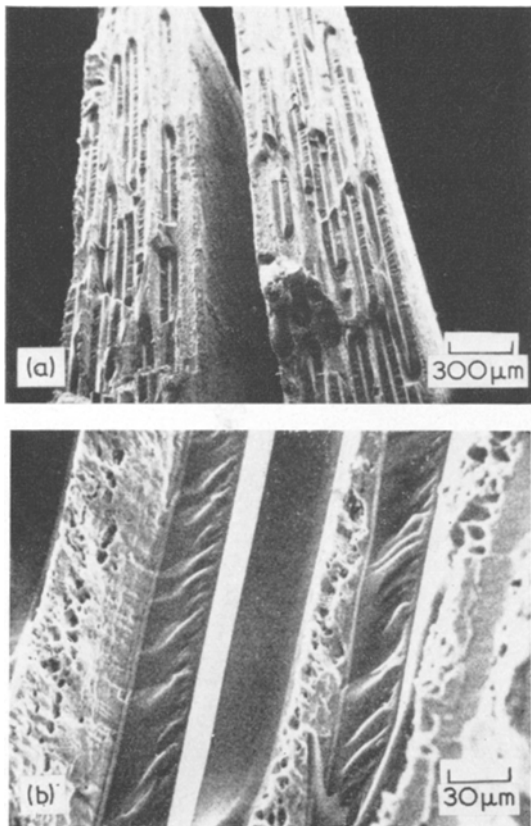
Transverse tensile fracture of 0.1 mm BORSIC-Al.
